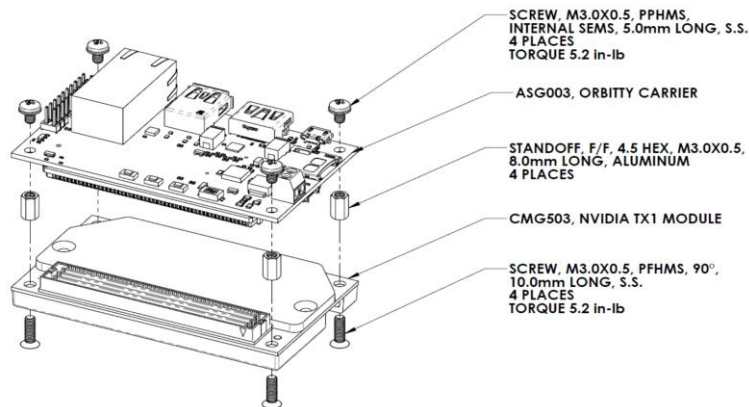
Exploded view of the TX1, carrier board, and standoffs
